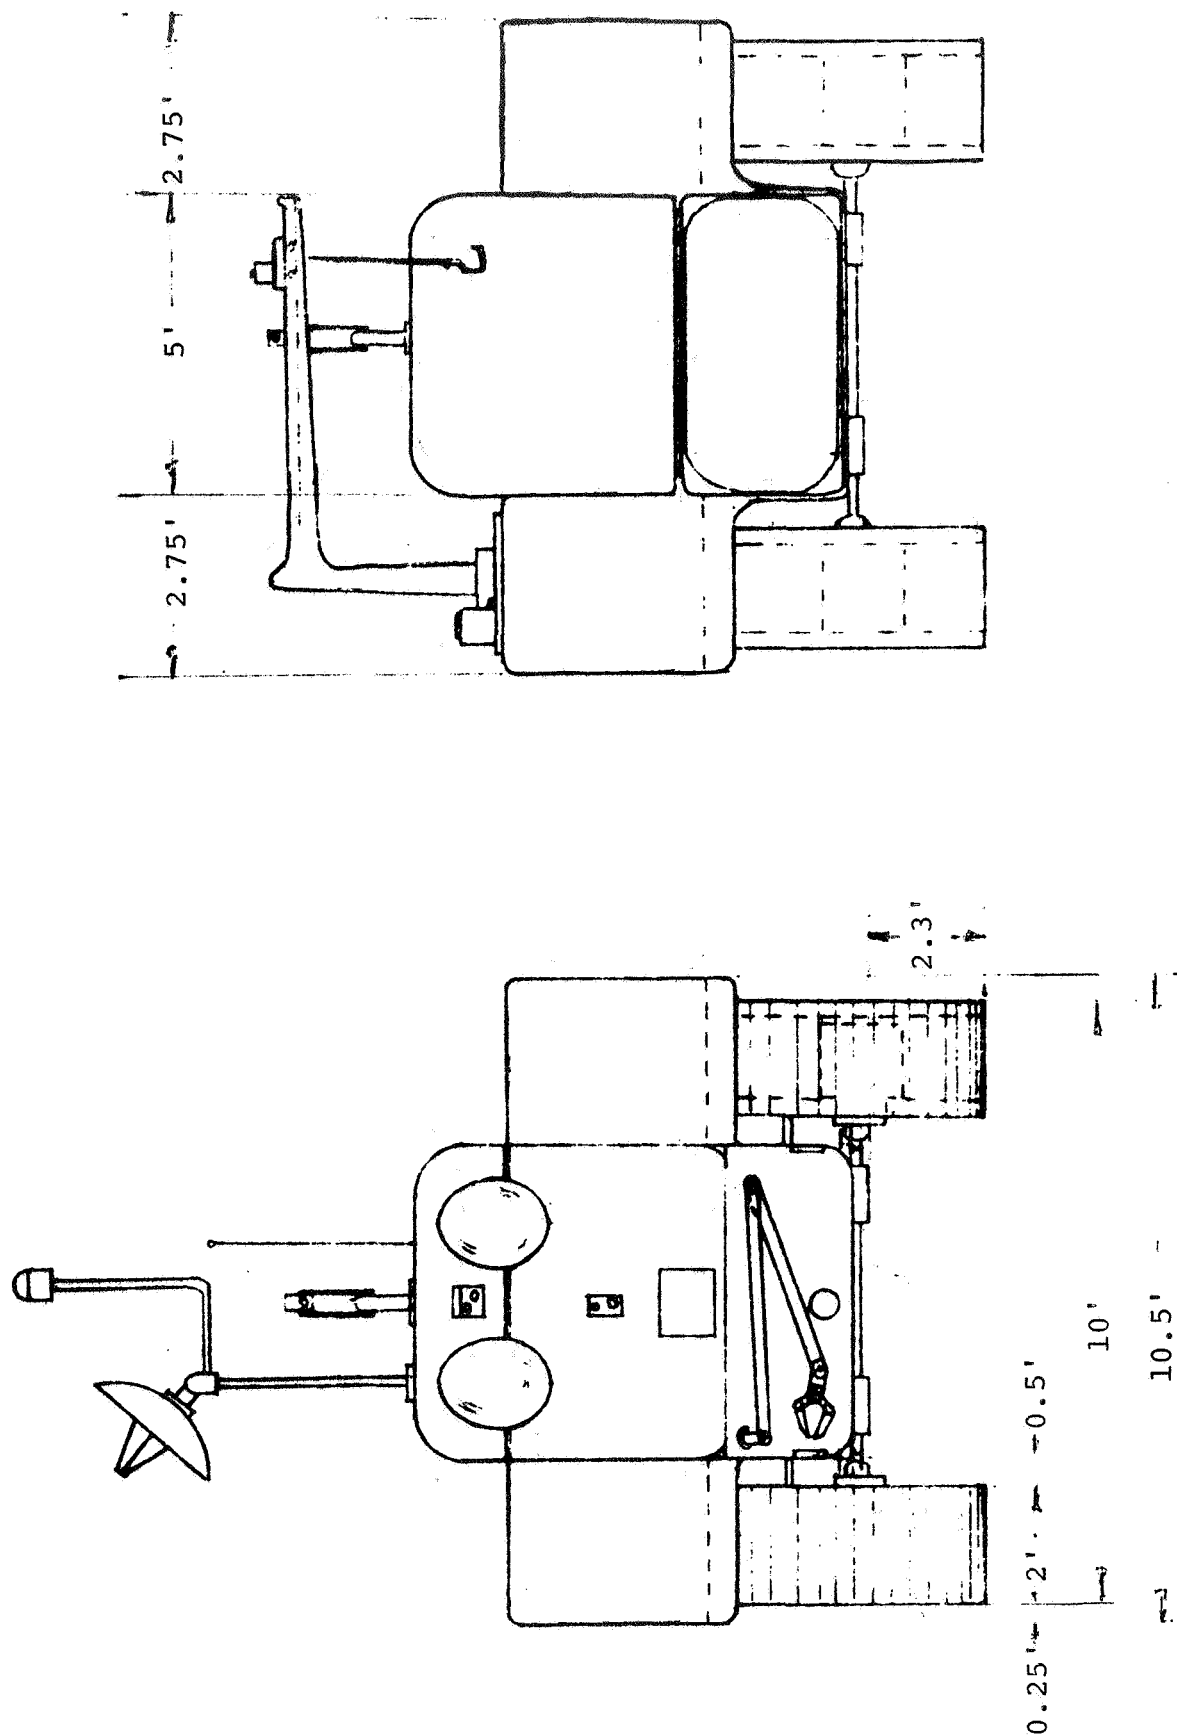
FRONT AND REAR VIEW OF MULE
